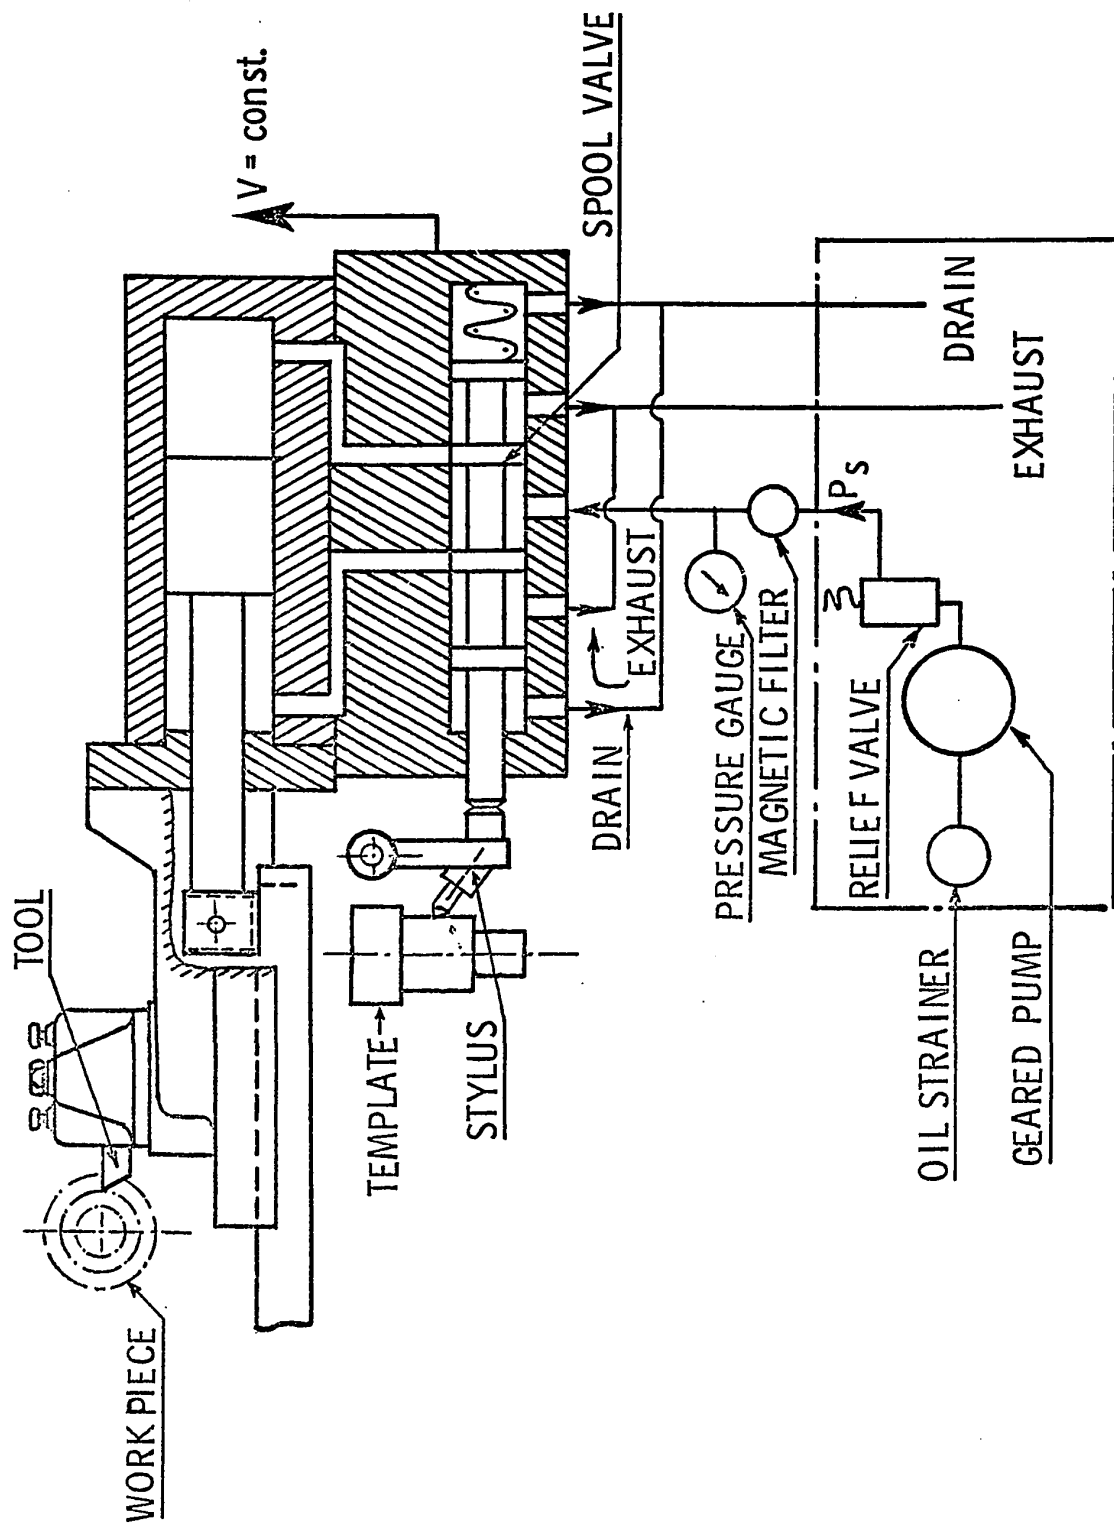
TWO-DIMENSIONAL HYDRAULIC COPYING SYSTEM FOR A LATHE
